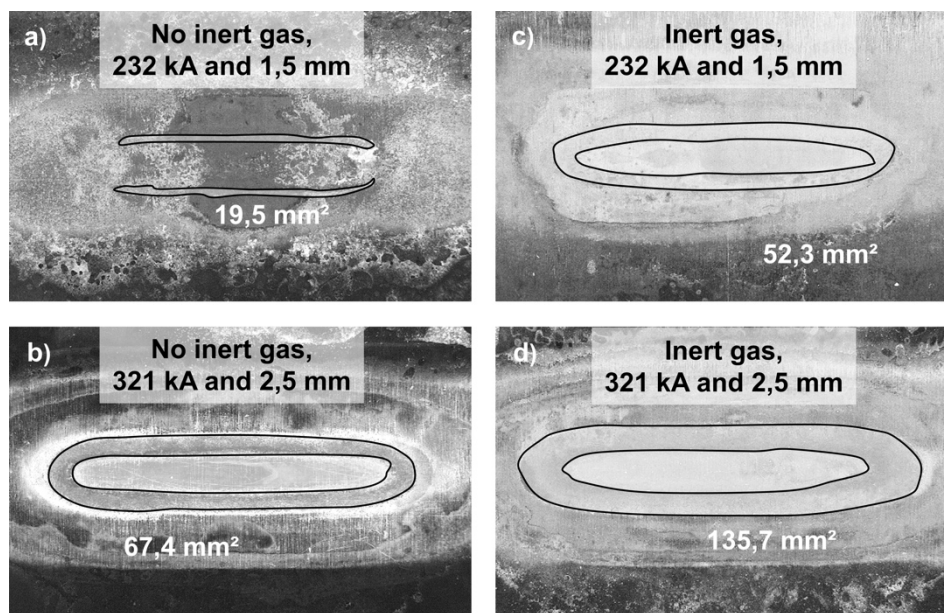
Top view of MPW weld seams joined using different process parameters, with and without a nozzle-based application of inert gas during welding.
